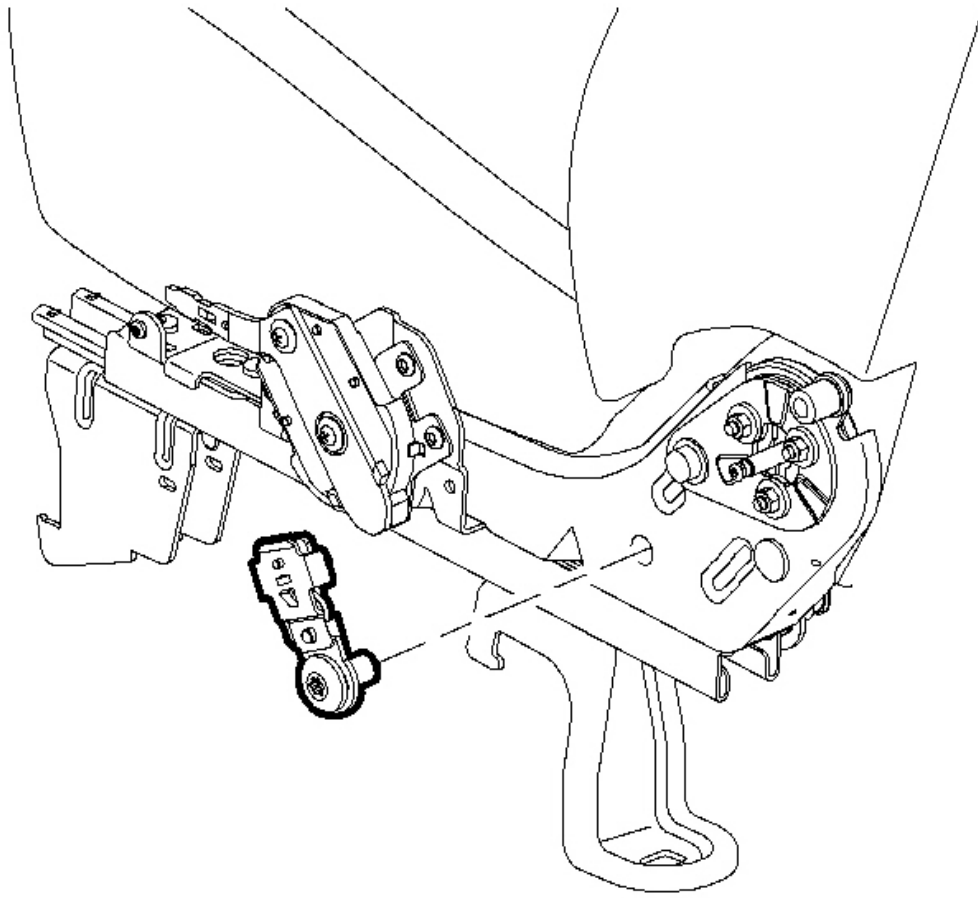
Removing/Installing Shoulder Belt Quick Disconnect Bolt
